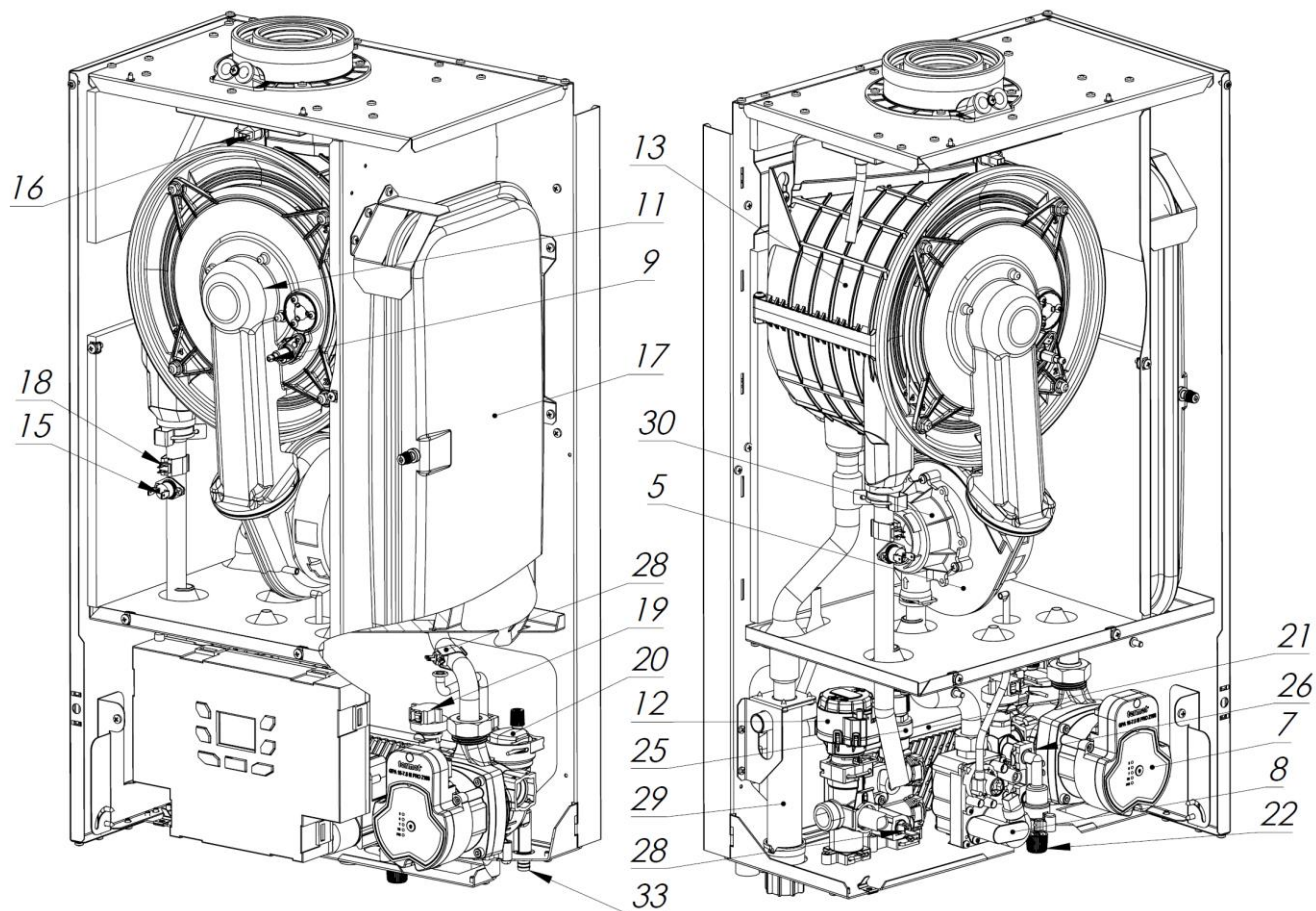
Component layout of the GCB-C57 combi boiler.
